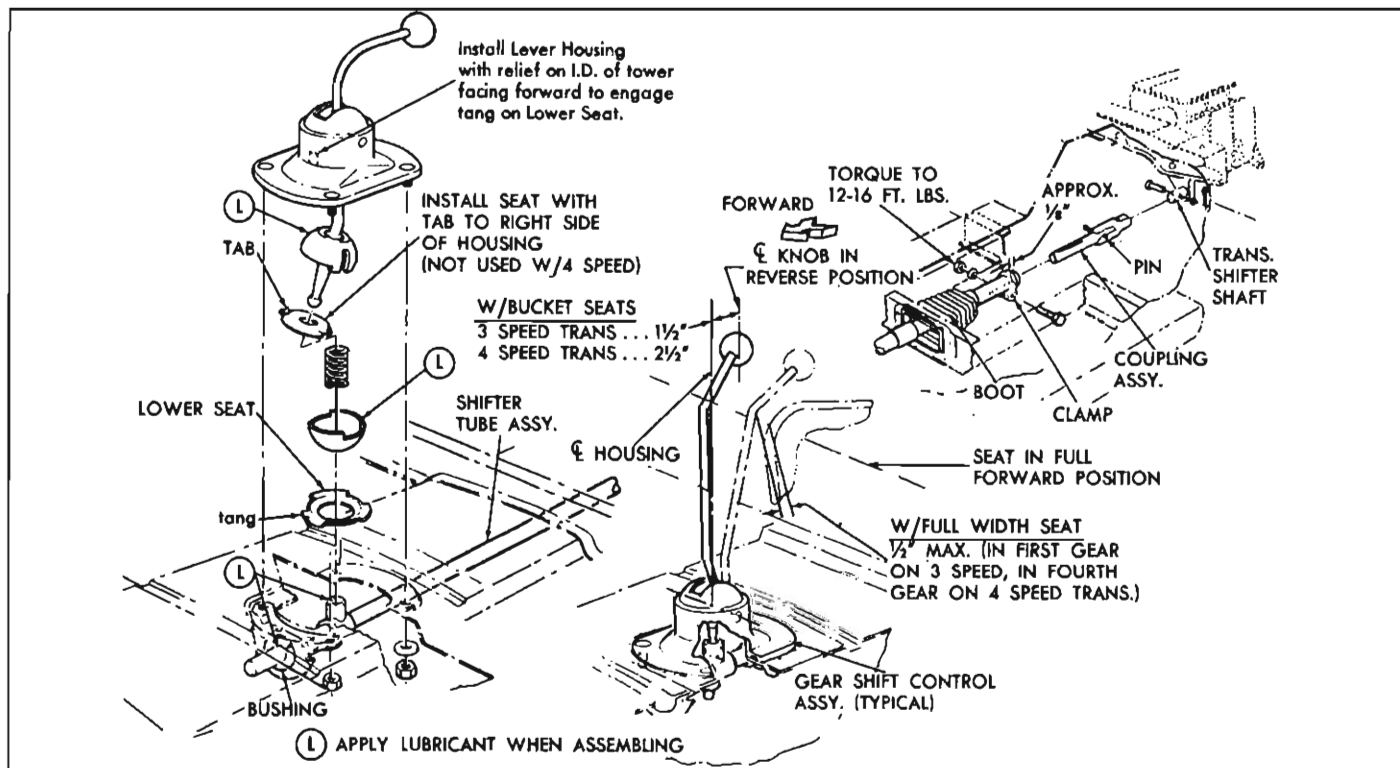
D-1—Passenger Gearshift Lever and Linkage—Exploded
